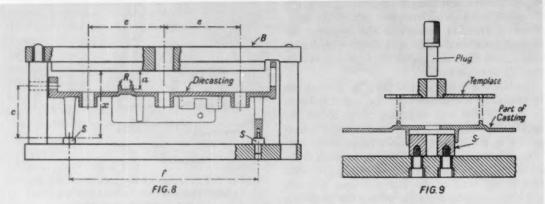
A multi-dimensional gaging fixture is here shown partly in section.
